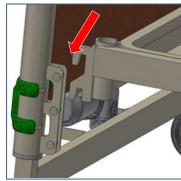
Foot section attachment Figure 5: Collar locked to bed end
